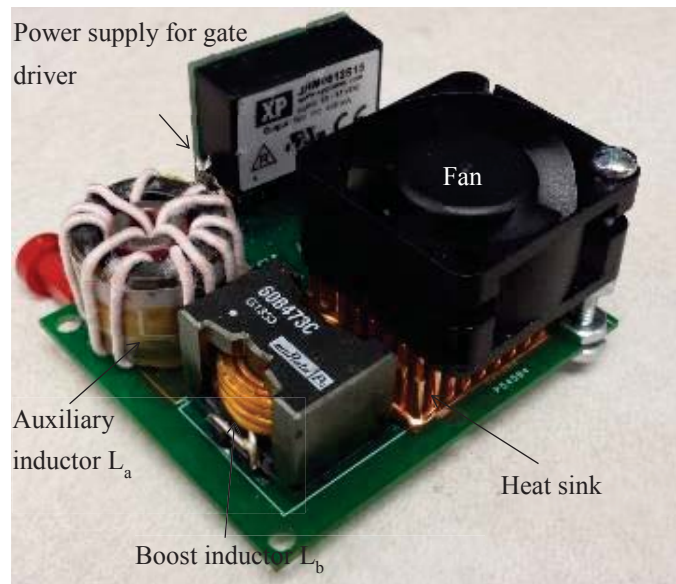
Assembly of packaged DBC substrate (Figure E-8) with PCB and heat sink.
